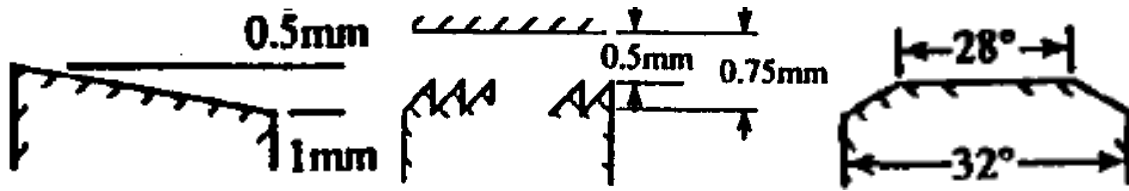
Three pole profiles: tapered, sawtooth, and chamfered. [12].
